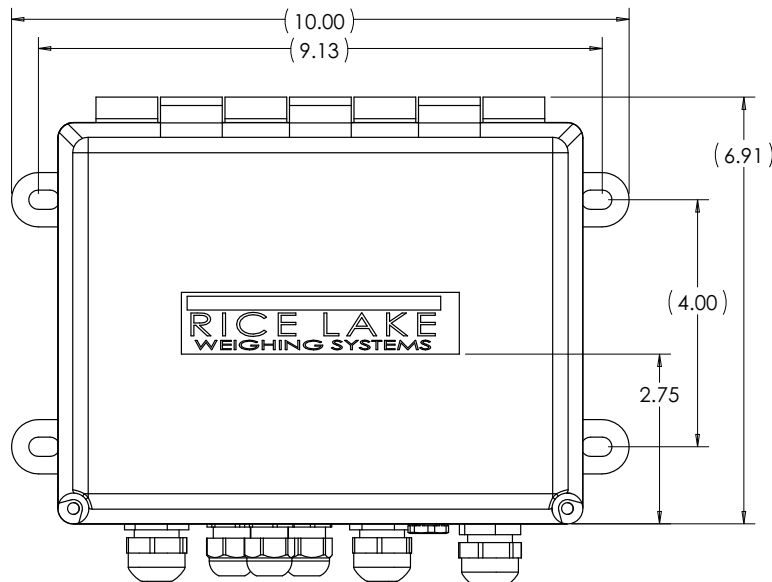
882IS I/O Module Enclosure Dimensions (noted in inches)
